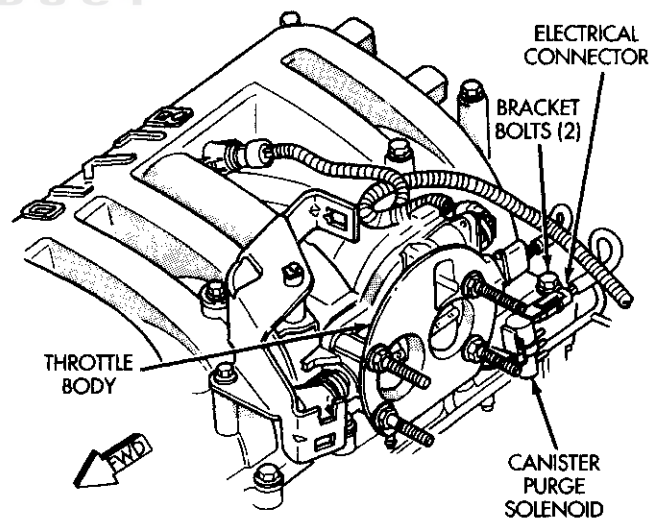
EVAP Canister Purge Solenoid—8.0L Engine
